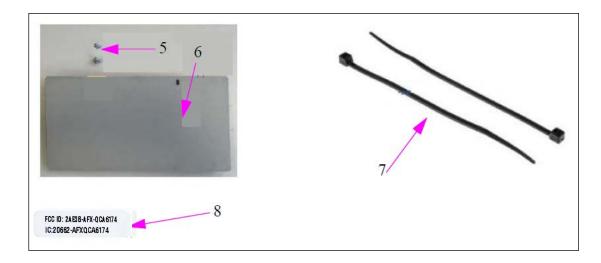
Wi-Fi + BT Modem Module Assembly Parts (5-8)
